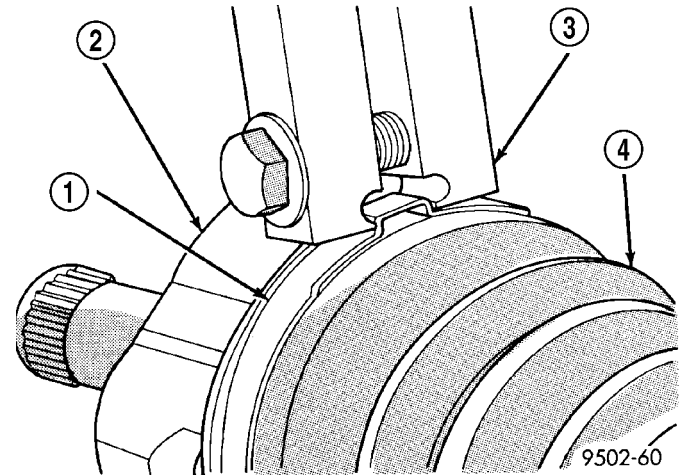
Crimping Tool Installed on Sealing Boot Clamp
